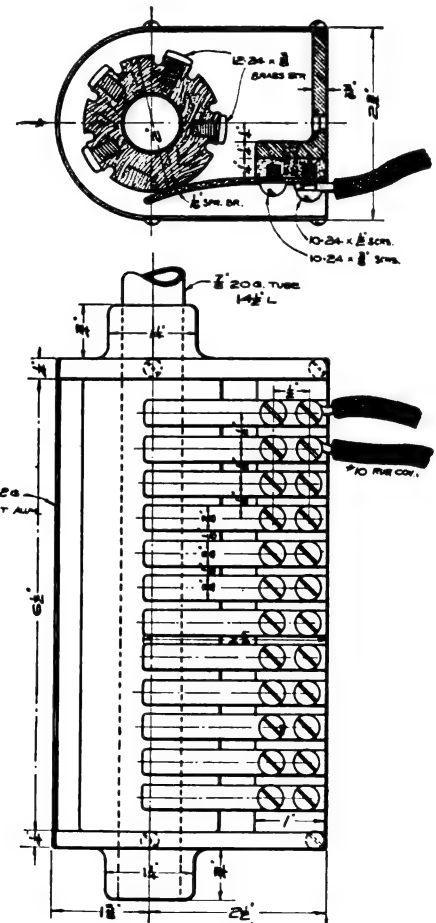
SECTIONAL PLAN AND ELEVATION OF CONTROLLER.
